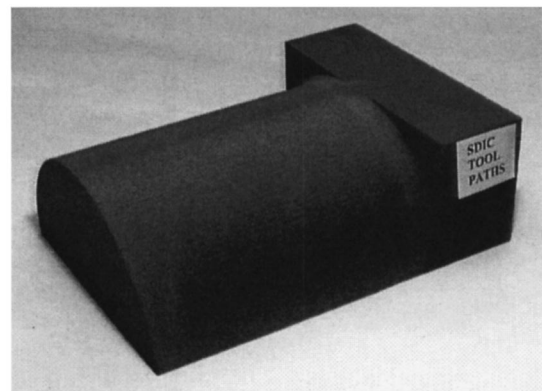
SDIC tool paths and machined component with surface tolerance 0.01 mm
